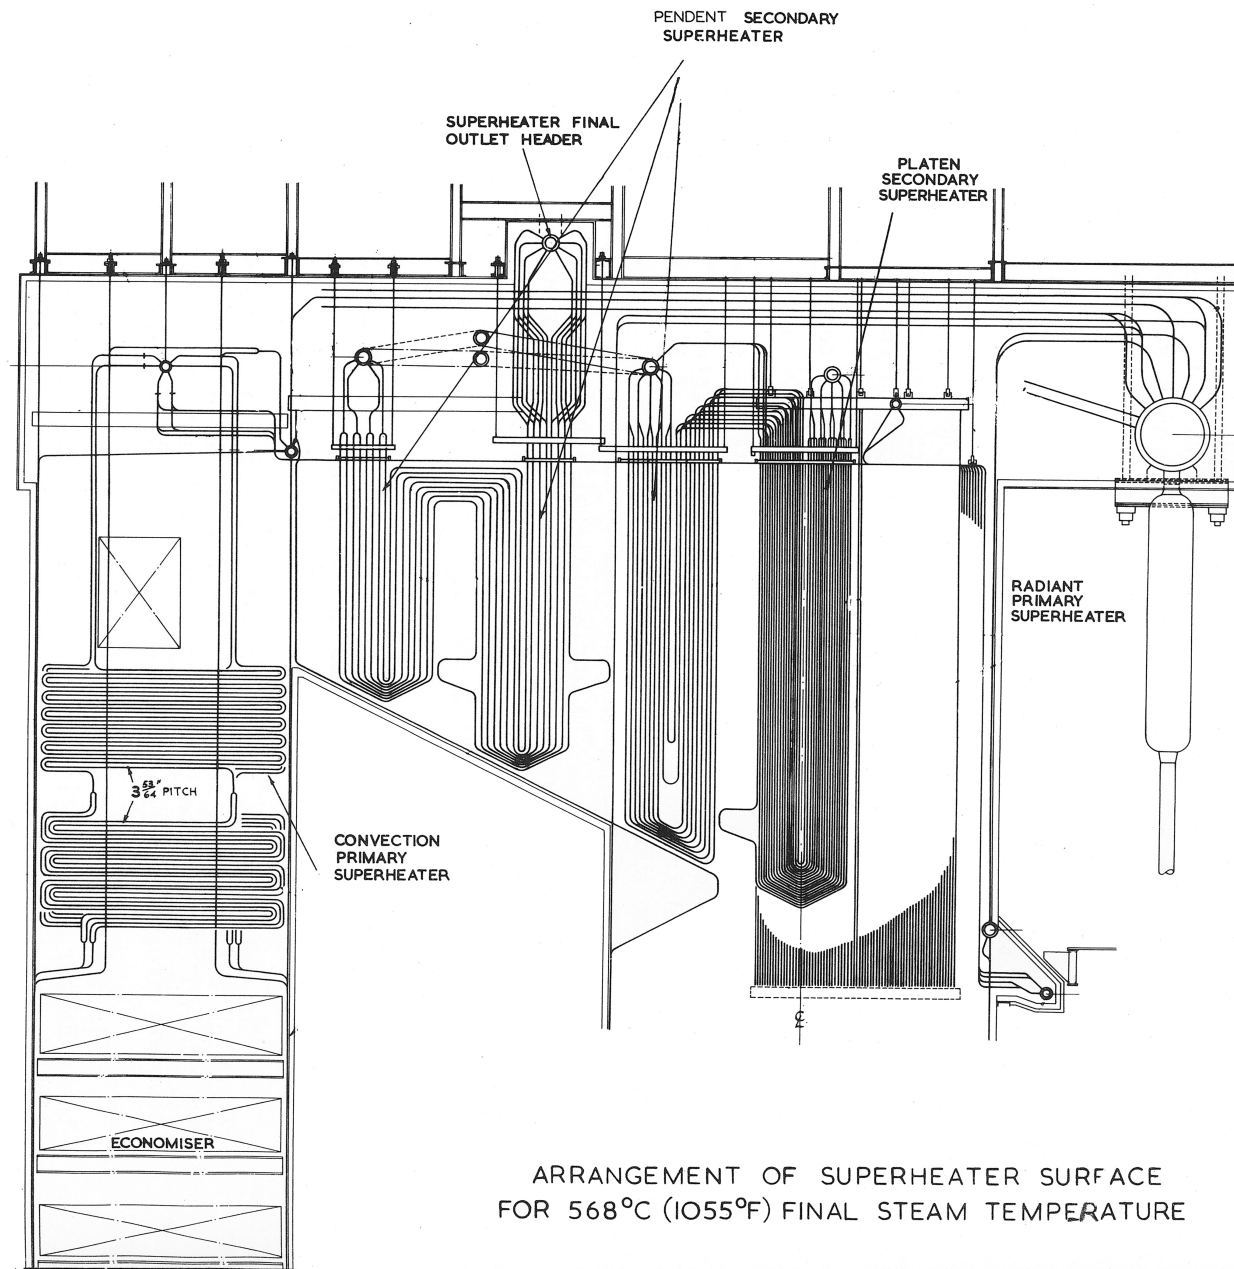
BOILER UNIT WITH PLATEN SUPERHEATER SURFACE
